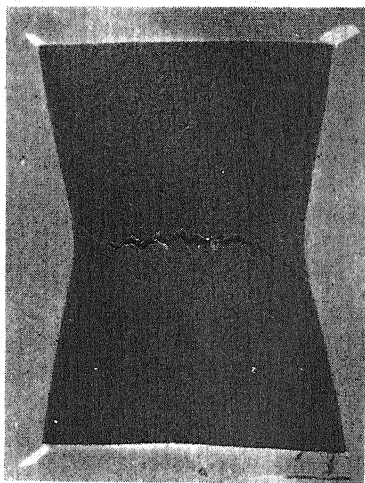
Path of Fracture Through Cylindrical Bar of Mild Steel Tested in Tension.
